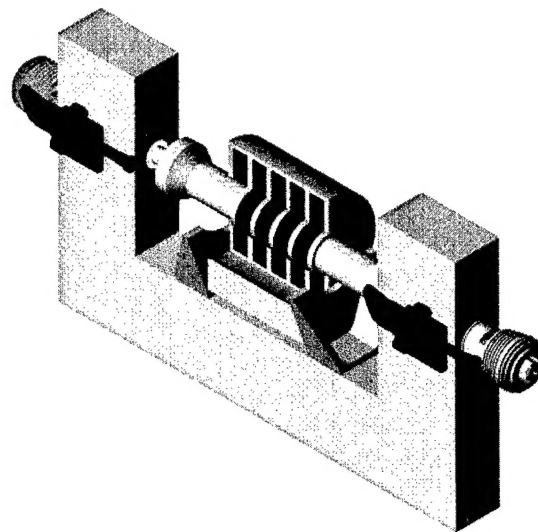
Cutaway view of lineal generator showing coil assembly in position around magnetic piston.
